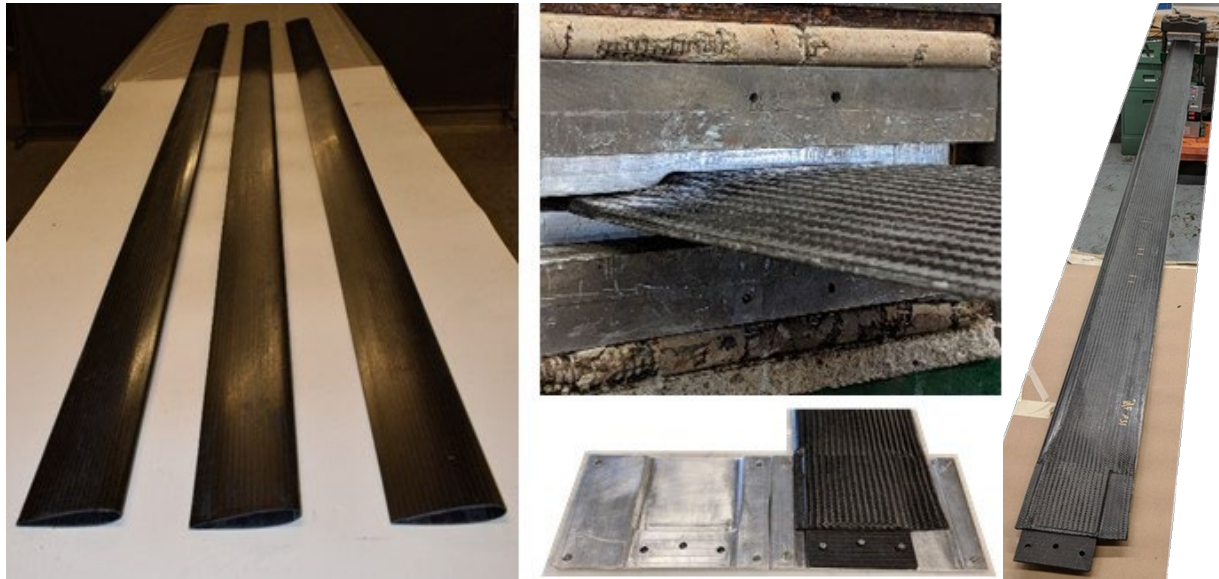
Trimmed 129" blades (left), Thermoforming of the mounting tab (middle), straight blades with integrated mounting tabs (right)
